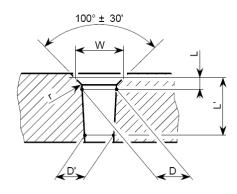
Hole Geometry (Geometry Code C9) and dimensional requirements for installation of Countersunk tapered shank bolt
